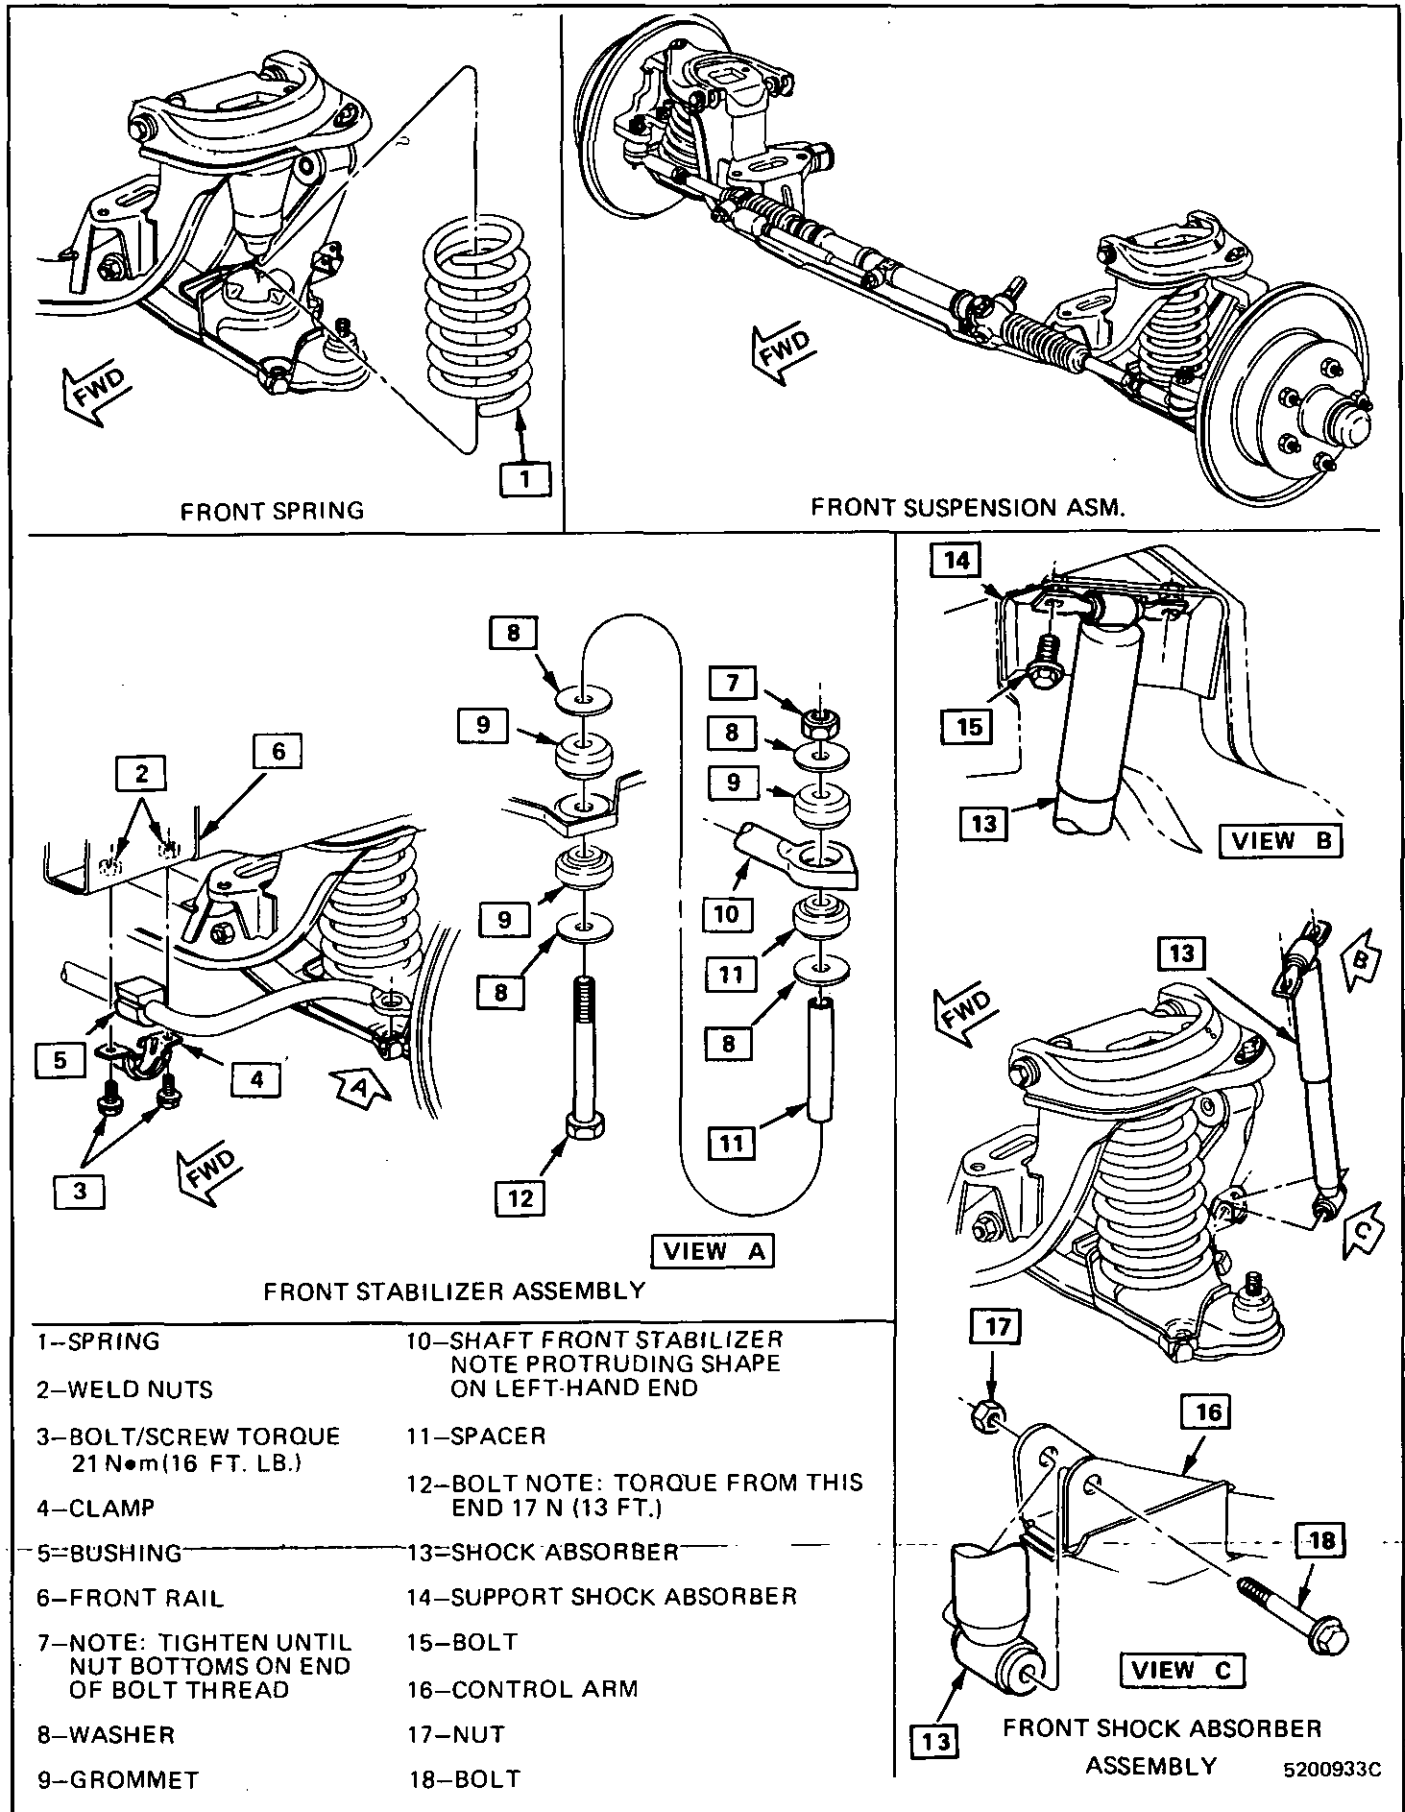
Front Shock Absorber, Stabilizer and Spring Assembly
